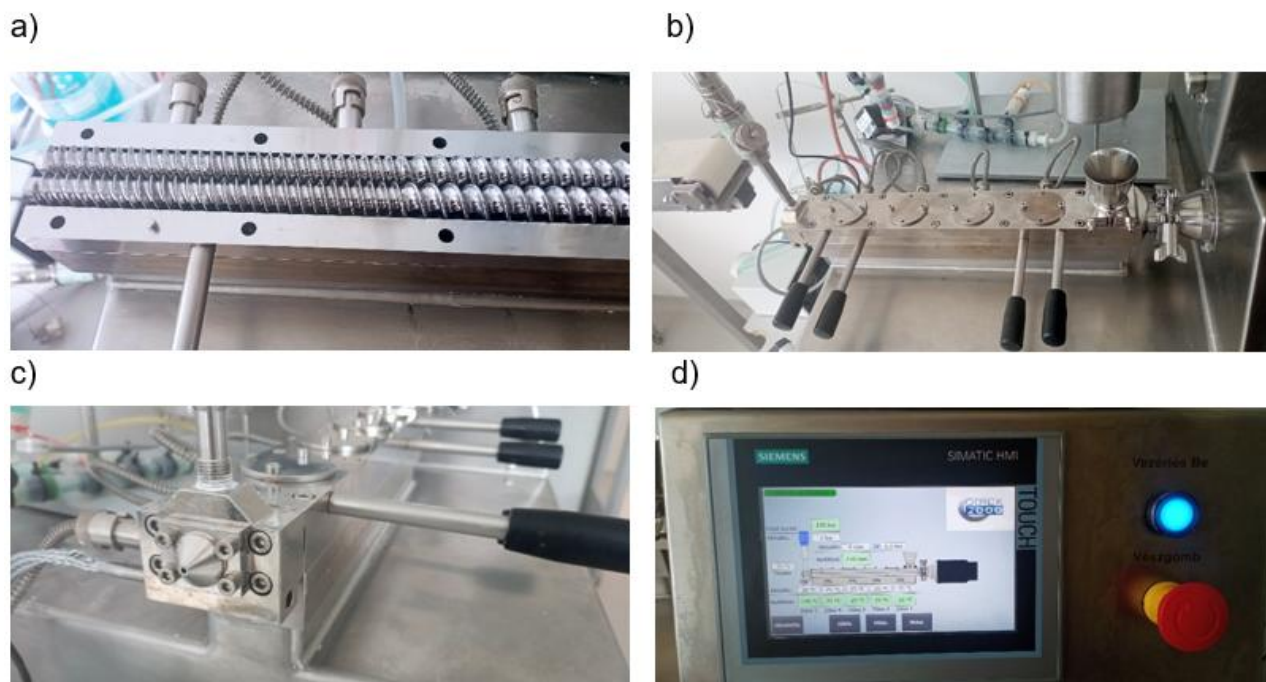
Extruder parts: a) twin-screws, b) ready to use closed extruder chamber with thermometer, c) extruder nozzle, d) extruder's control touch panel
